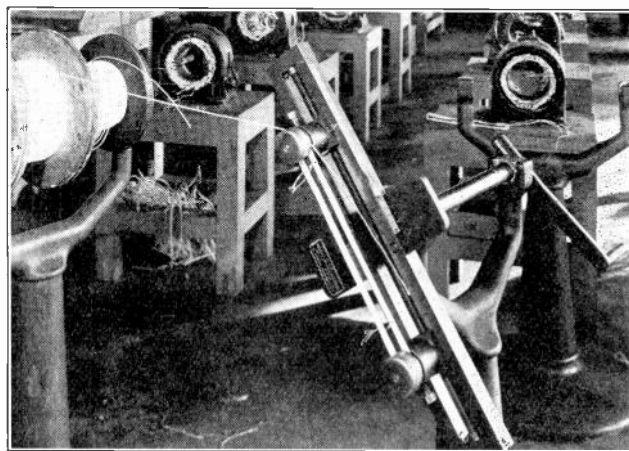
The above view shows a coil winder which can be used for winding coil loops of different sizes, by adjusting the end pins along the slide. When the crank is turned the wire is wound directly from the spool into the slots on these end pins.
